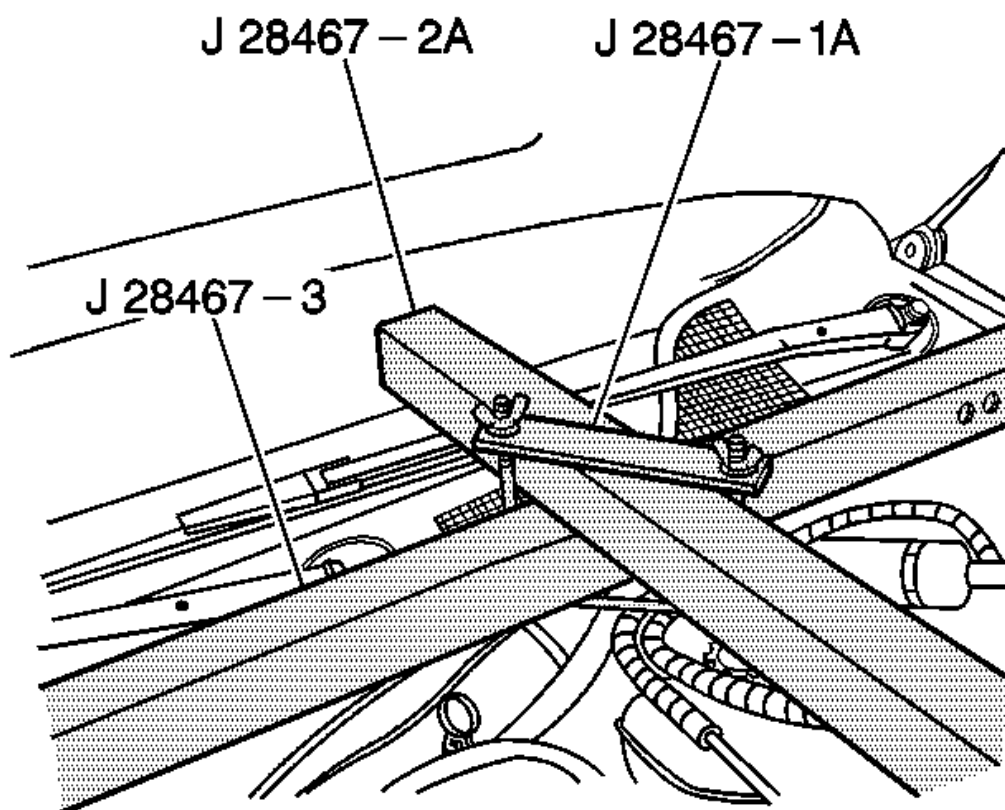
Installing Cross Bracket Assembly J 28467-1A
